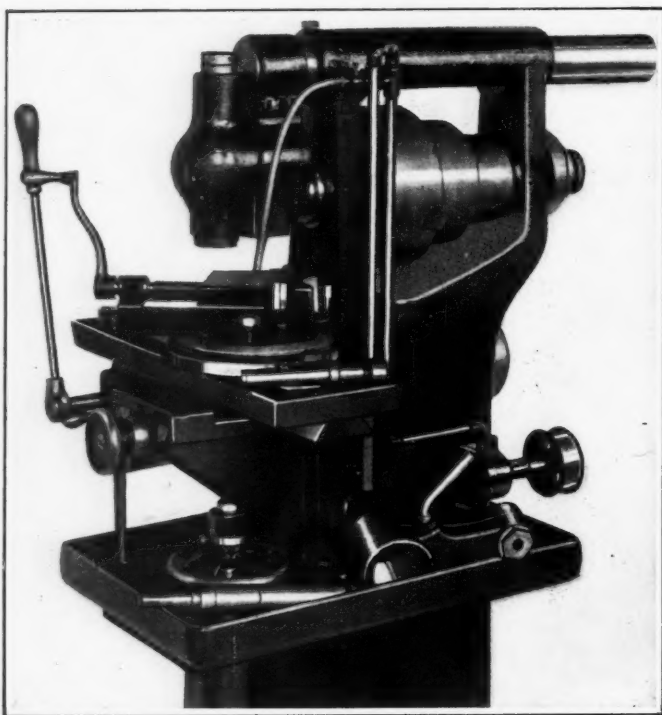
Bickford Plain Milling Machine equipped with Vertical Attachment and Swivel Vise
